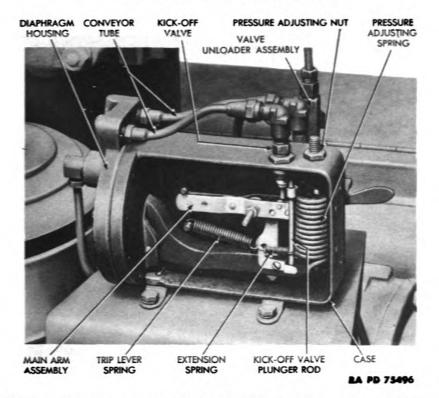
Compressor Unloader Pilot Valve — Cover Removed
